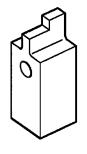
Setting Up to Machine I.D. of Bushing or Lug at Location 4, Y453.000 (Sheet 1)
